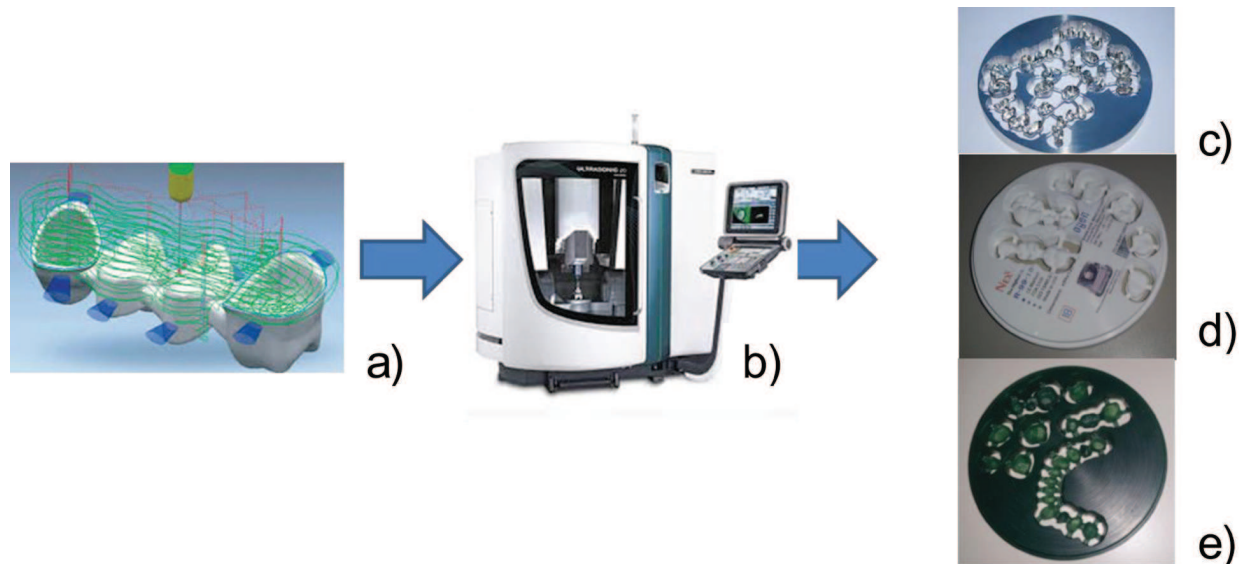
NC CAM subtraction manufacturing process (High Speed Milling)
